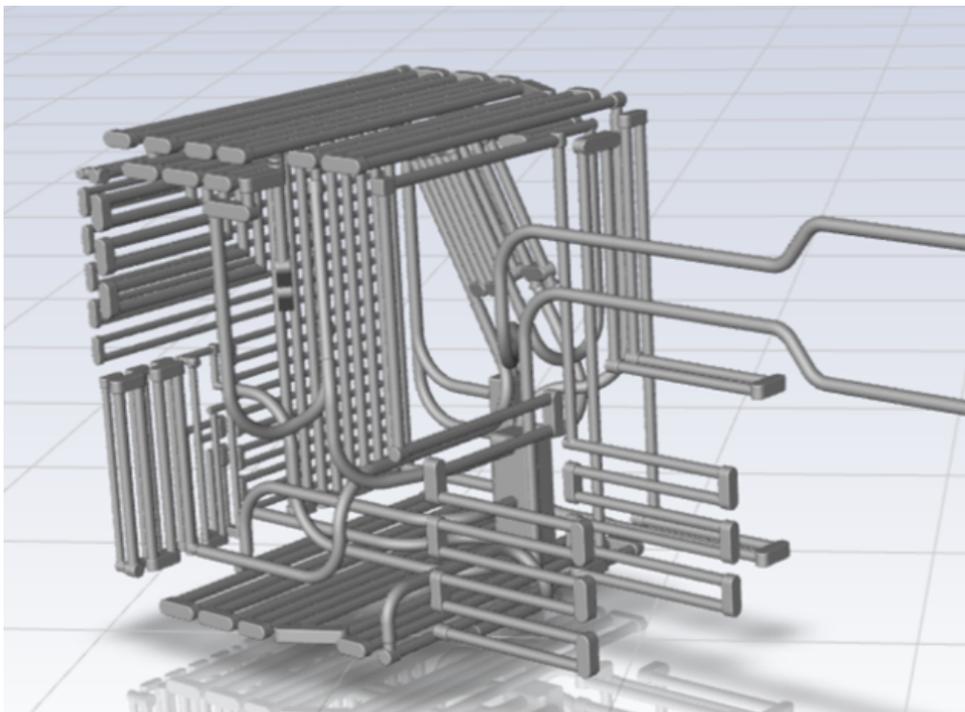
Cooling circuit of the in-vessel First Mirror Unit (Rough dimensions L690mm by W 333mm by H 484mm)
